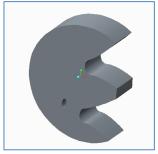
Isometric view of 3-D asymmetric gear with hole in 1st trial.
